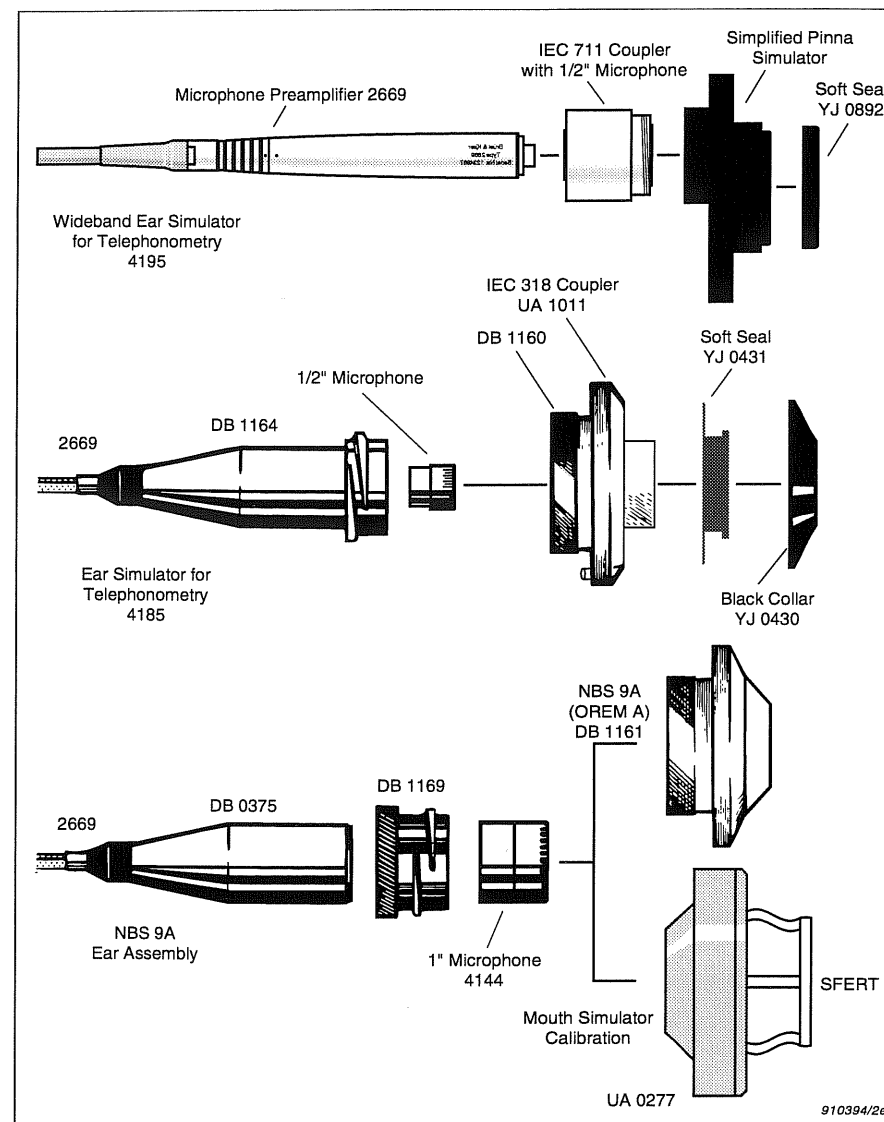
Parts for the assembly of Ear Simulators Types 4195, 4185 and the OREMA coupler
